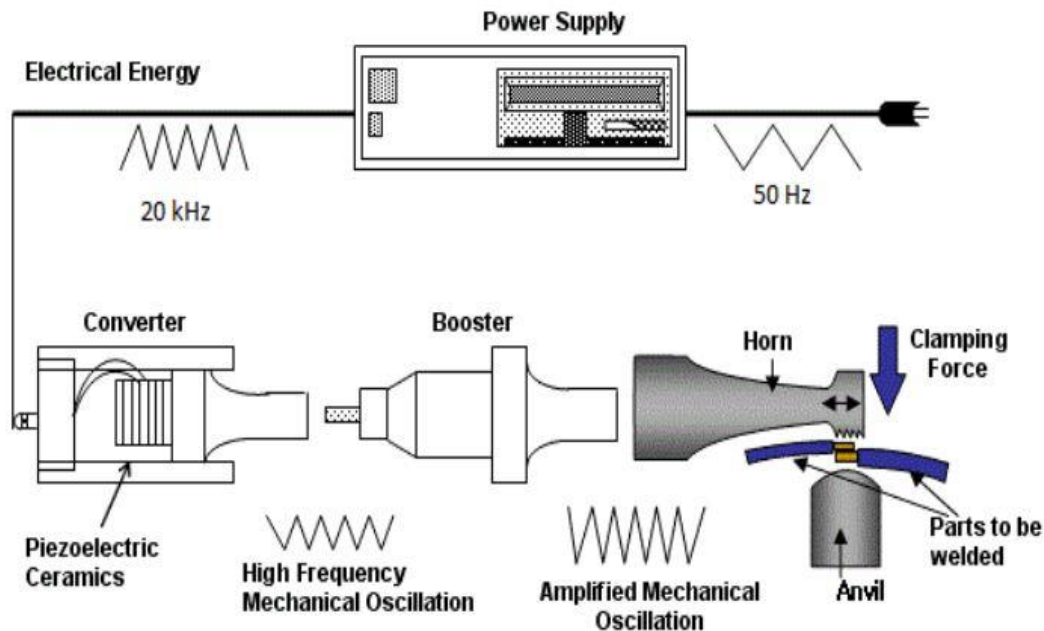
Illustration of ultrasonic metal welding system [1]
